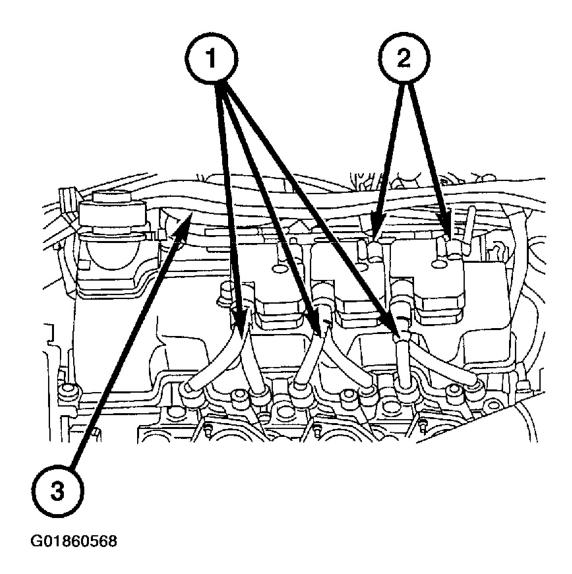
Routing Vacuum Hoses & Connecting Crankcase Ventilator Hose, Ignition Coils & Spark Plug Wires
